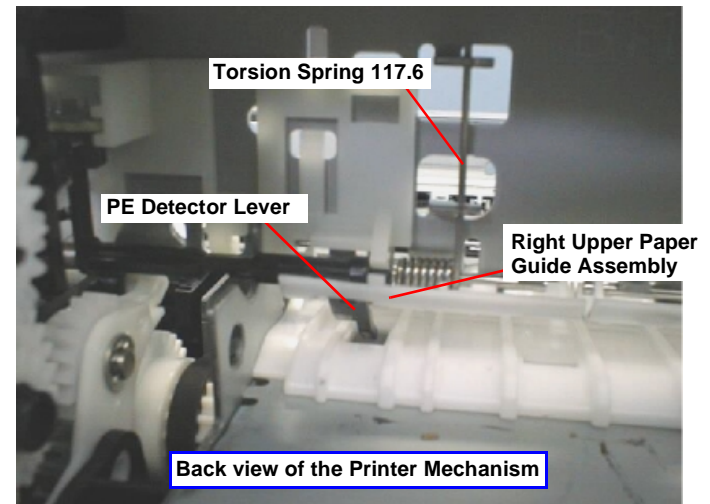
Installing the Right Upper Paper Guide Assy.
